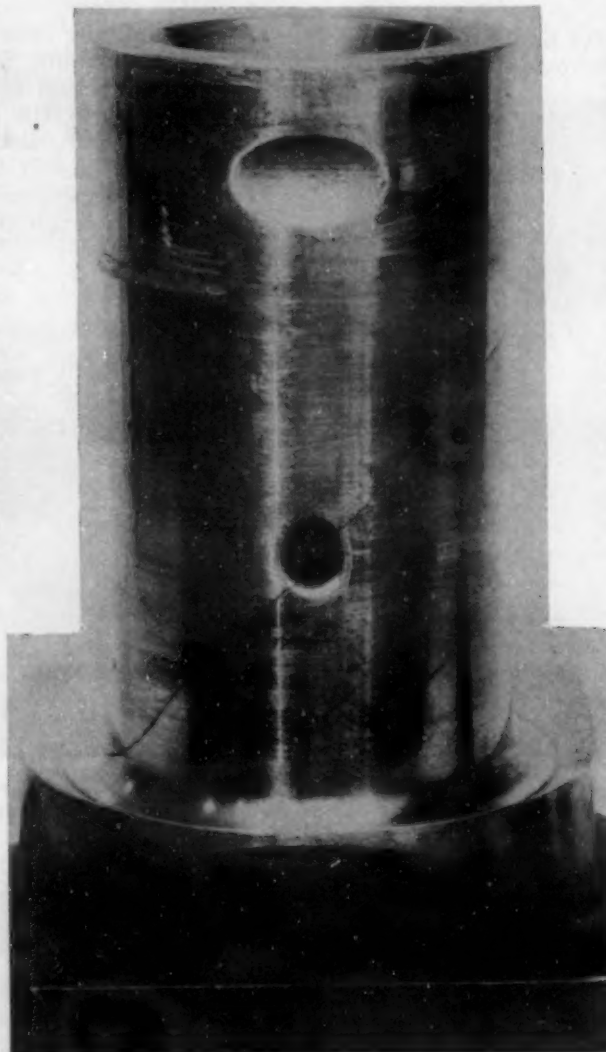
Fig. A. Fatigue failure of airplane engine crankshaft. Crack started at oil hole.
